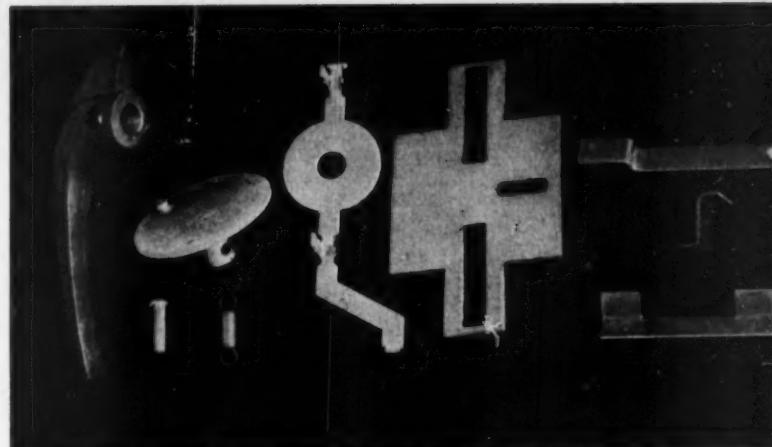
Above—Actuating handle and cam with other cover-mounted interlock parts. The guide cleat stamping combines two U-shape cleats, a center washer and a hook
